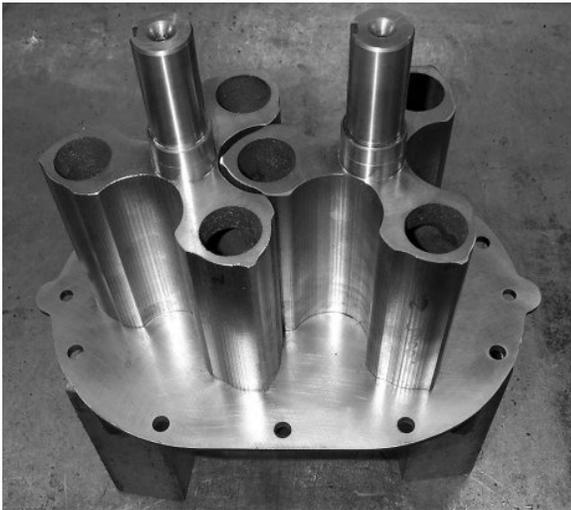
Rotors Assembled on Drive End Plate (Model 4000 with tri-lobe rotors shown)
